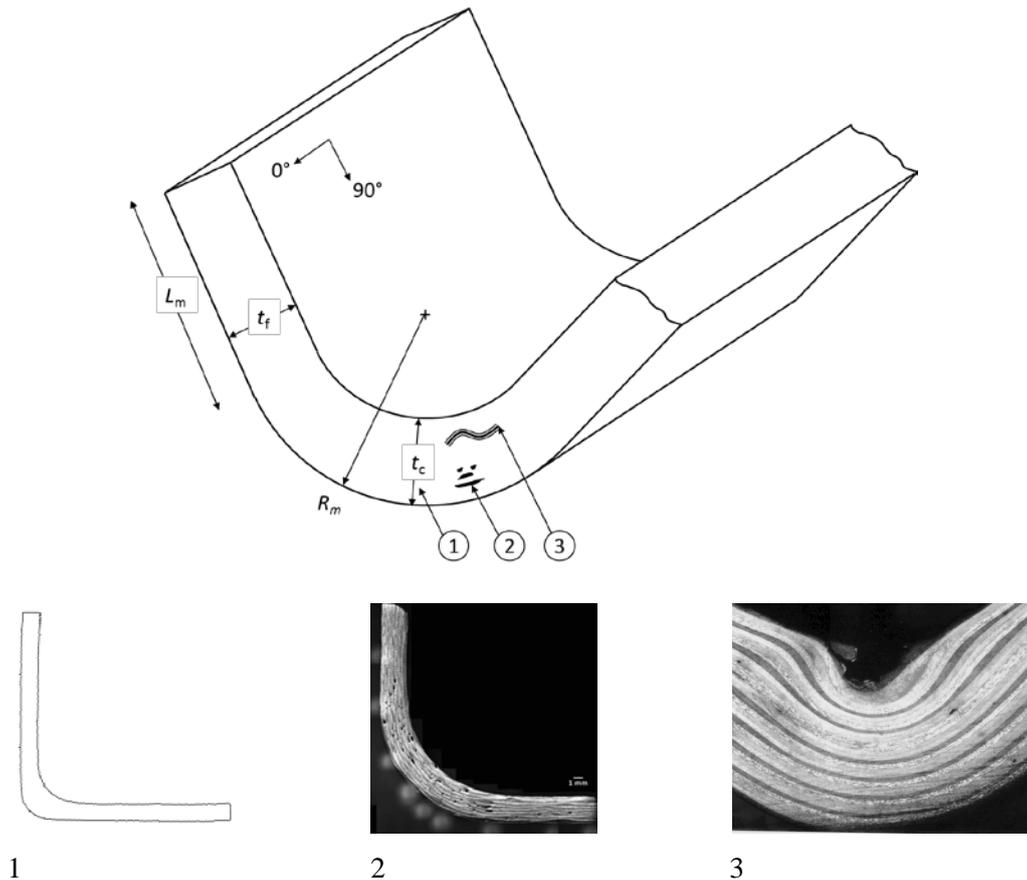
Geometrical representation of corners. R_m is the tool radius, t_f is the nominal flange thickness, t_c is the corner thickness, L_m is the flange length. Typical defects are represented: 1) Thickness deviation, 2) voids and 3) wrinkles. Images taken from [1, 7].
